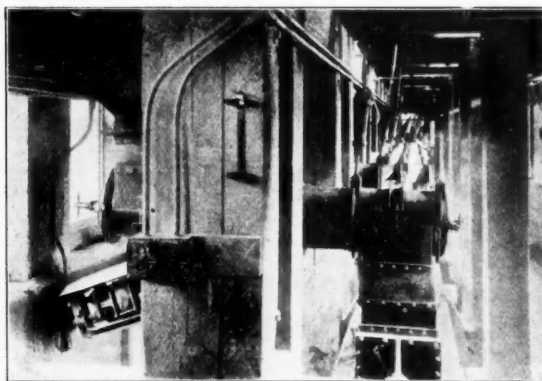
A Battery of Single Motor Tubular Feeders.
